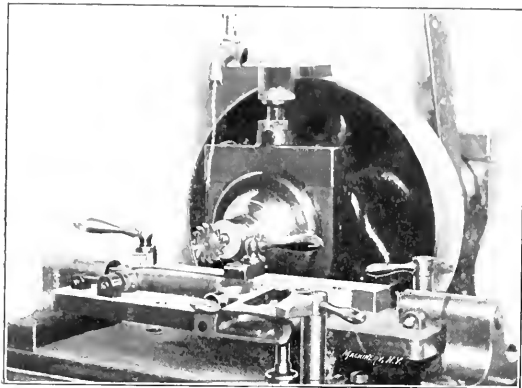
Hand Milling Slot in Receiver in a Reversing Fixture.
